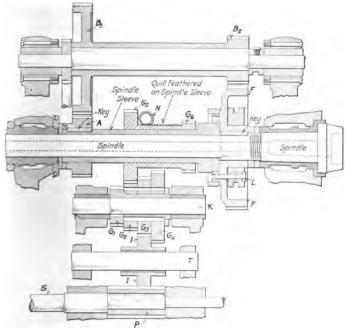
Diagram of spindle driving gears B. & S. milling machine.
